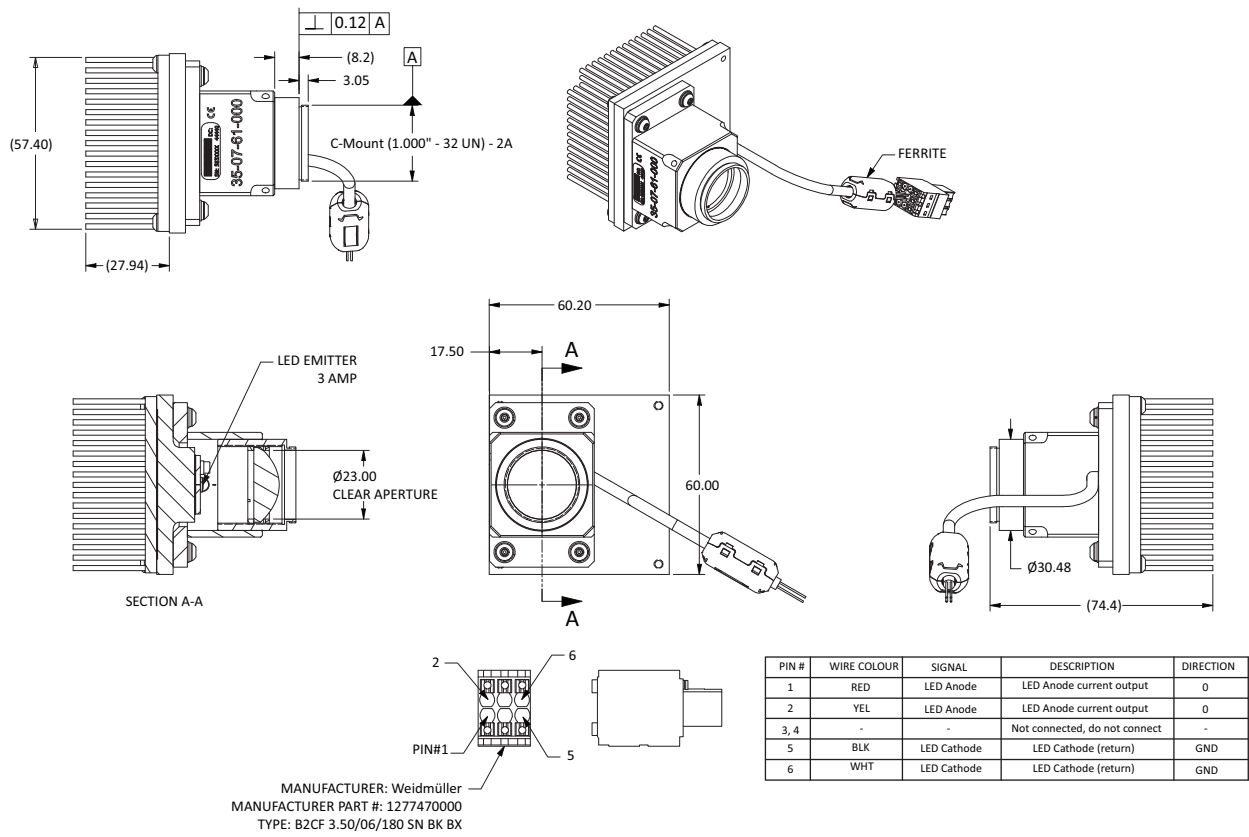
Optem® FUSION Illuminators – 3A Unit Dimensions
